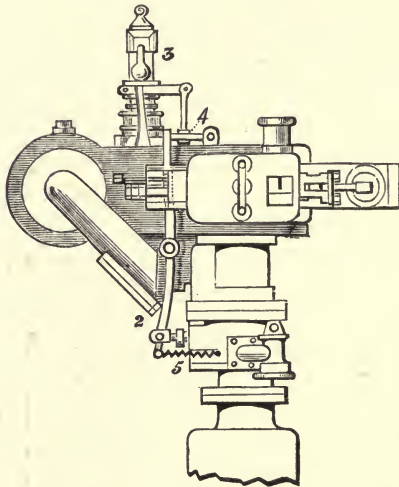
Clerk Engine showing Garrett Governor Gear.
